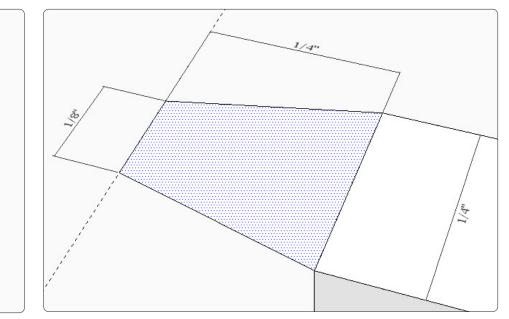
Create a trapezoid shape that will be used to make the beveled edge of the door panel.
